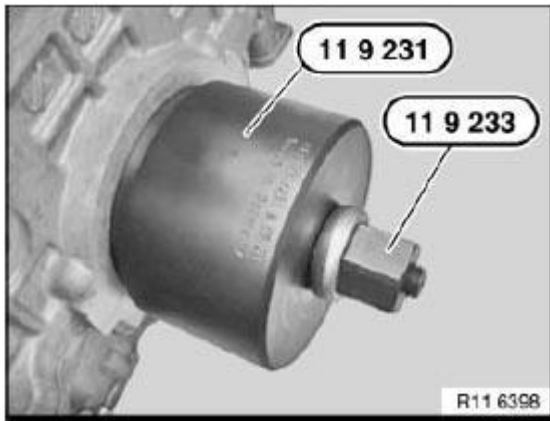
Identifying Special Tool (11 9 231 And 11 9 233)
